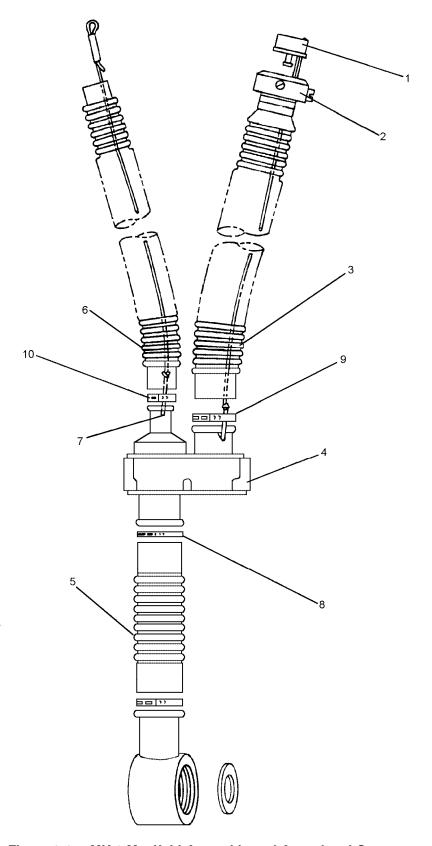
MK-2 Manifold Assembly and Associated Components
